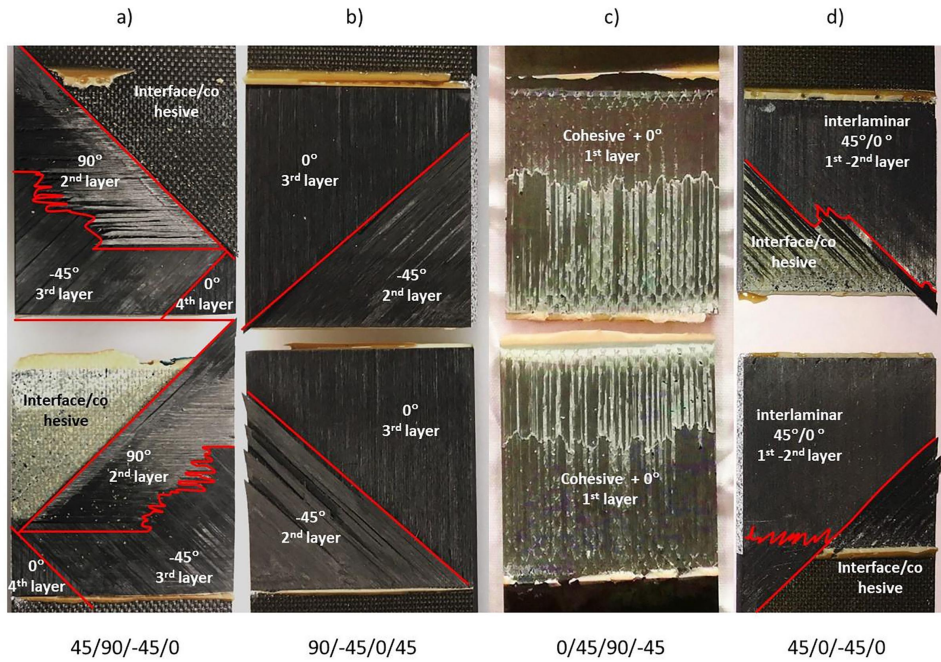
Typical fracture surfaces for different layup configurations in single lap joints. From Kupski et al. [38].
